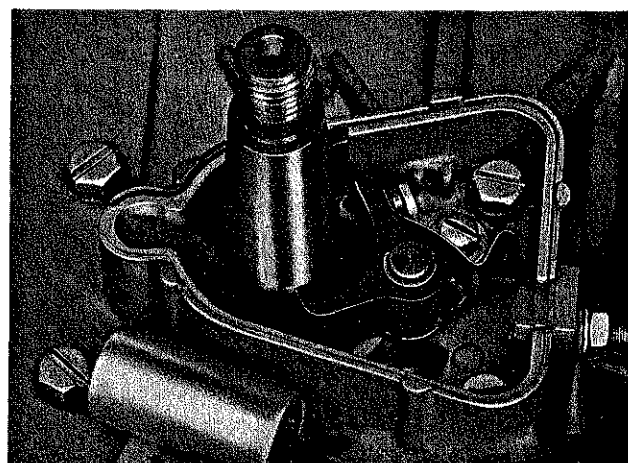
The presence of oil on the wiper felt, the breaker block, the points and the bottom of the breaker box indicates a leaking crankshaft oil seal.
